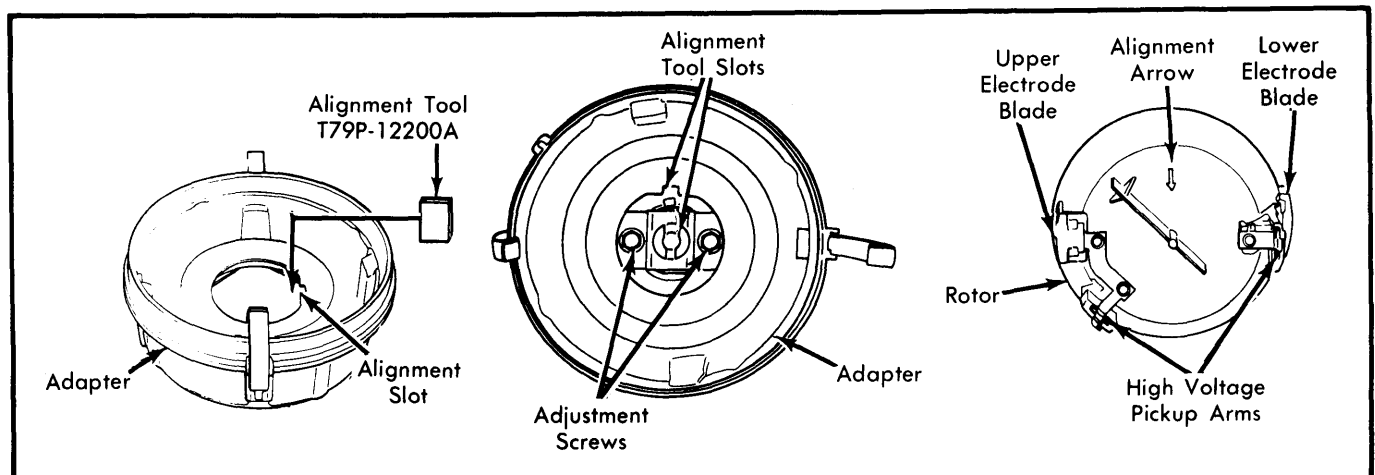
EEC III Rotor, Adapter and Alignment Procedure
